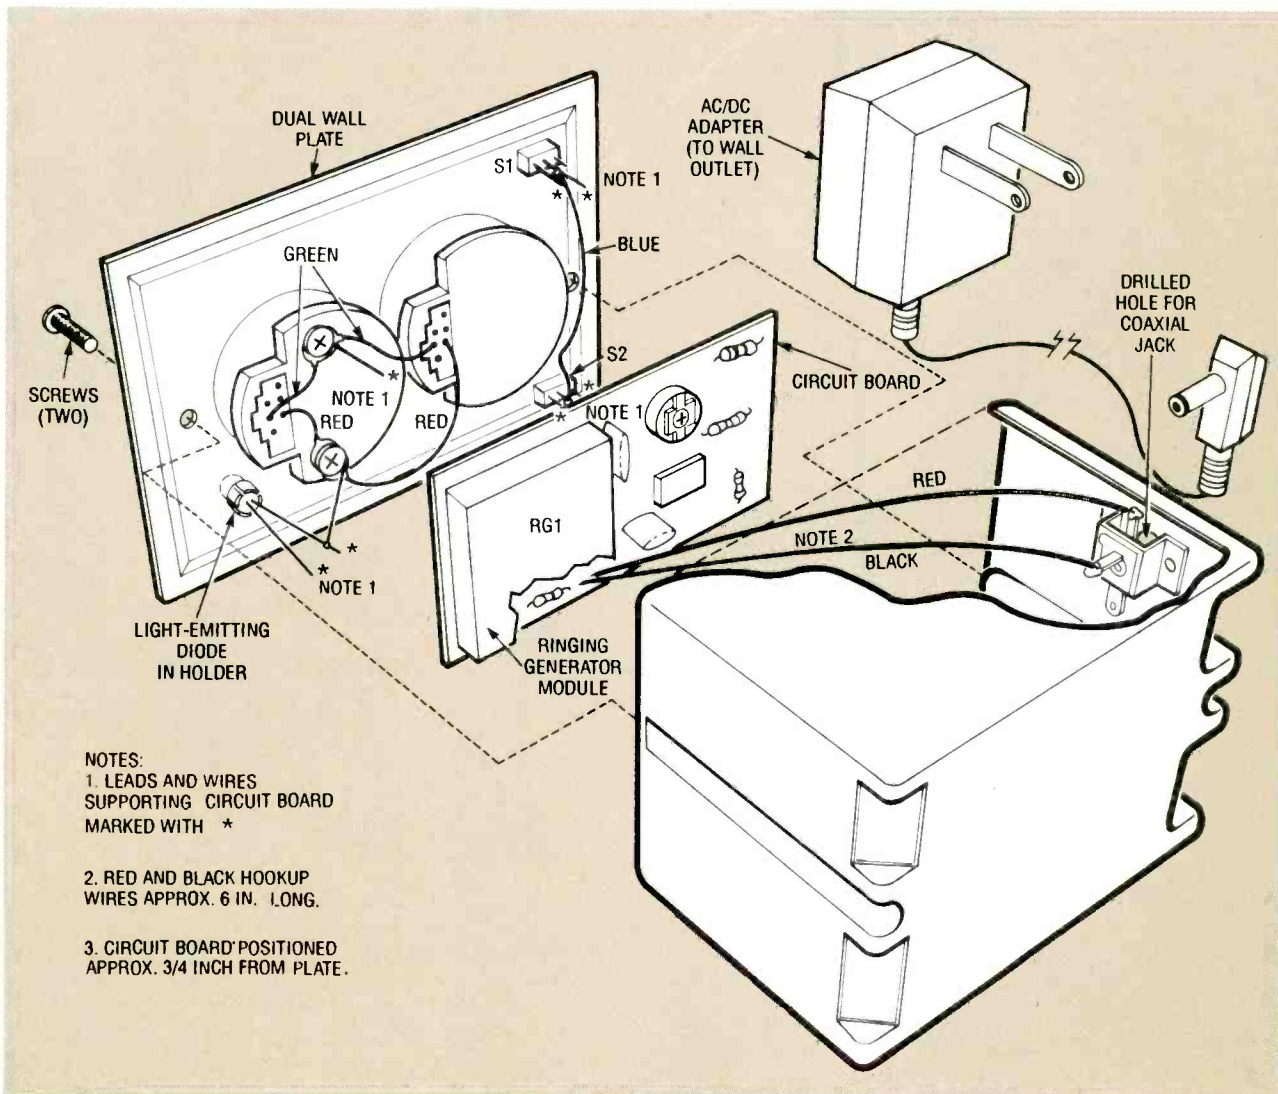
EXPLODED VIEW OF PHONE HELPER 1 showing showing method of assembly and off-board wiring.
